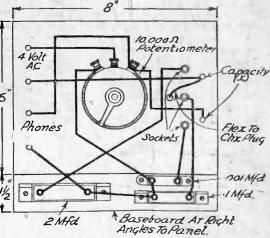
Sketch plan of lay-out and wiring diagram.
